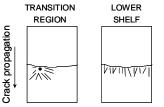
Typical cleavage fracture surfaces for fatigue pre-cracked specimens indicating differences in transition region and lower shelf behavior [1].
